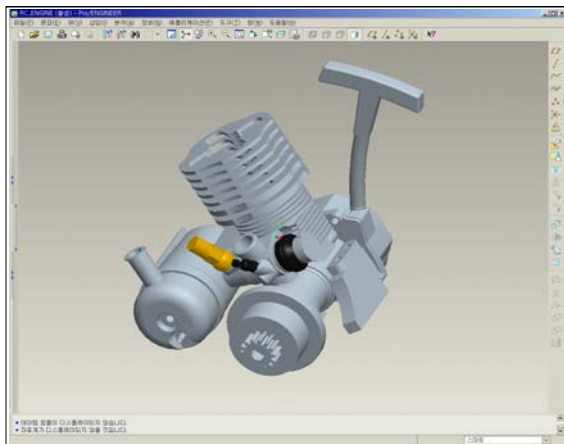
(a) The Window of 3D CAD using Pro/ENGINEER
